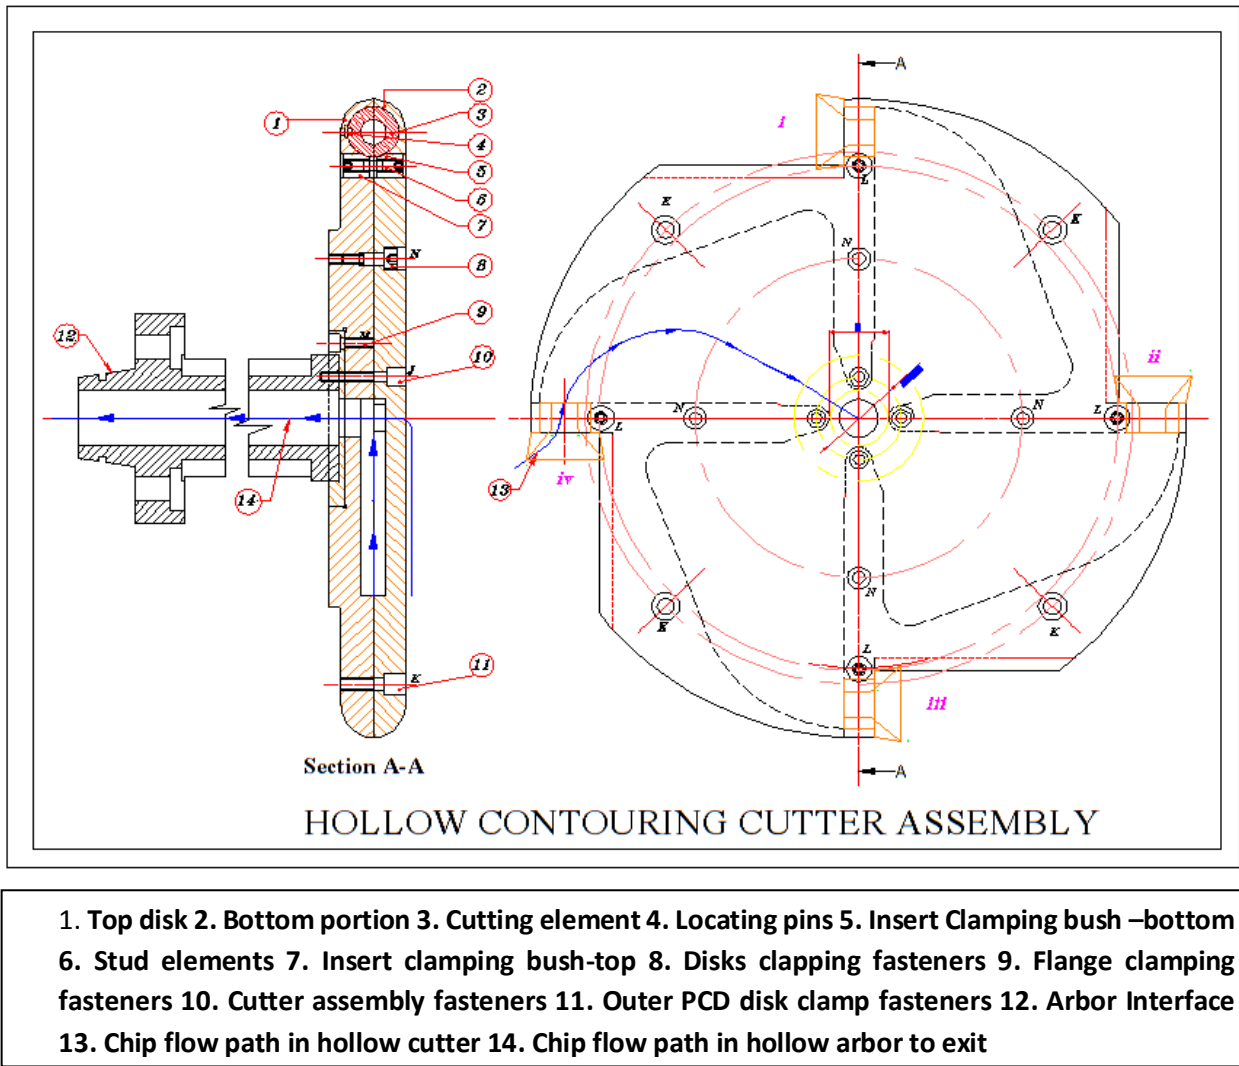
Turbine cutter (Hollow contouring cutter) assembly
